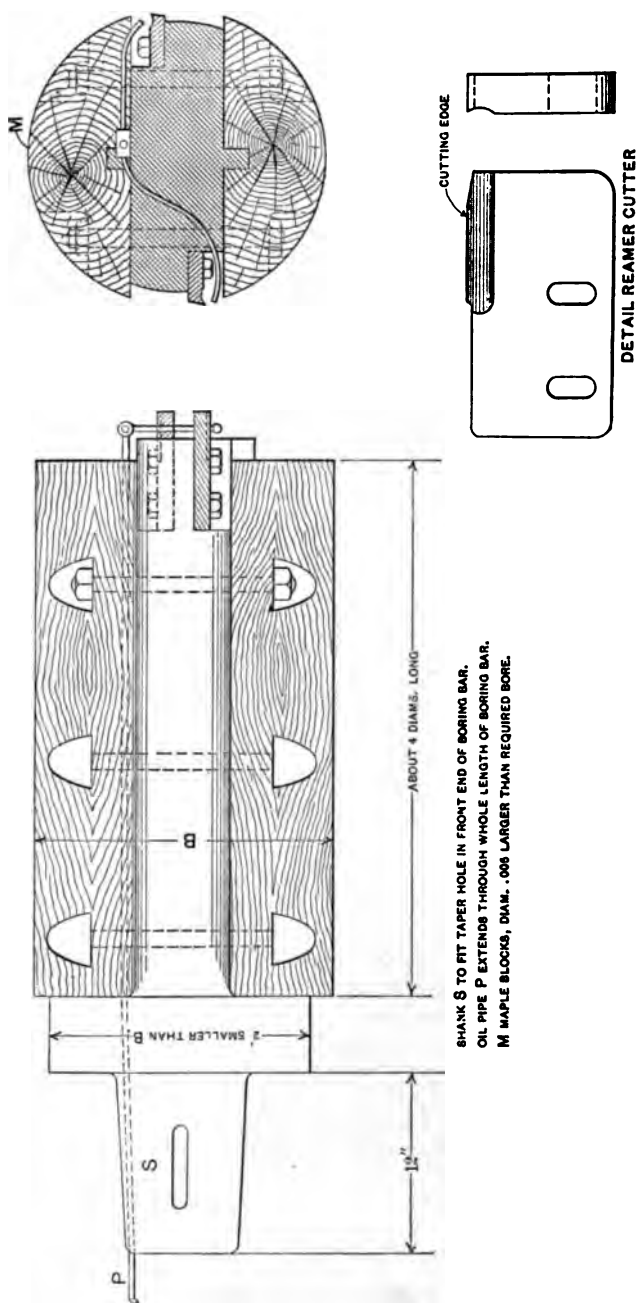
Front End of Boring Bar showing Method of Attaching Boring Head
